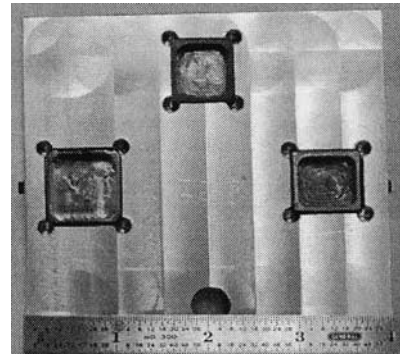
The configuration of mould inserts for the injection moulding processes.
